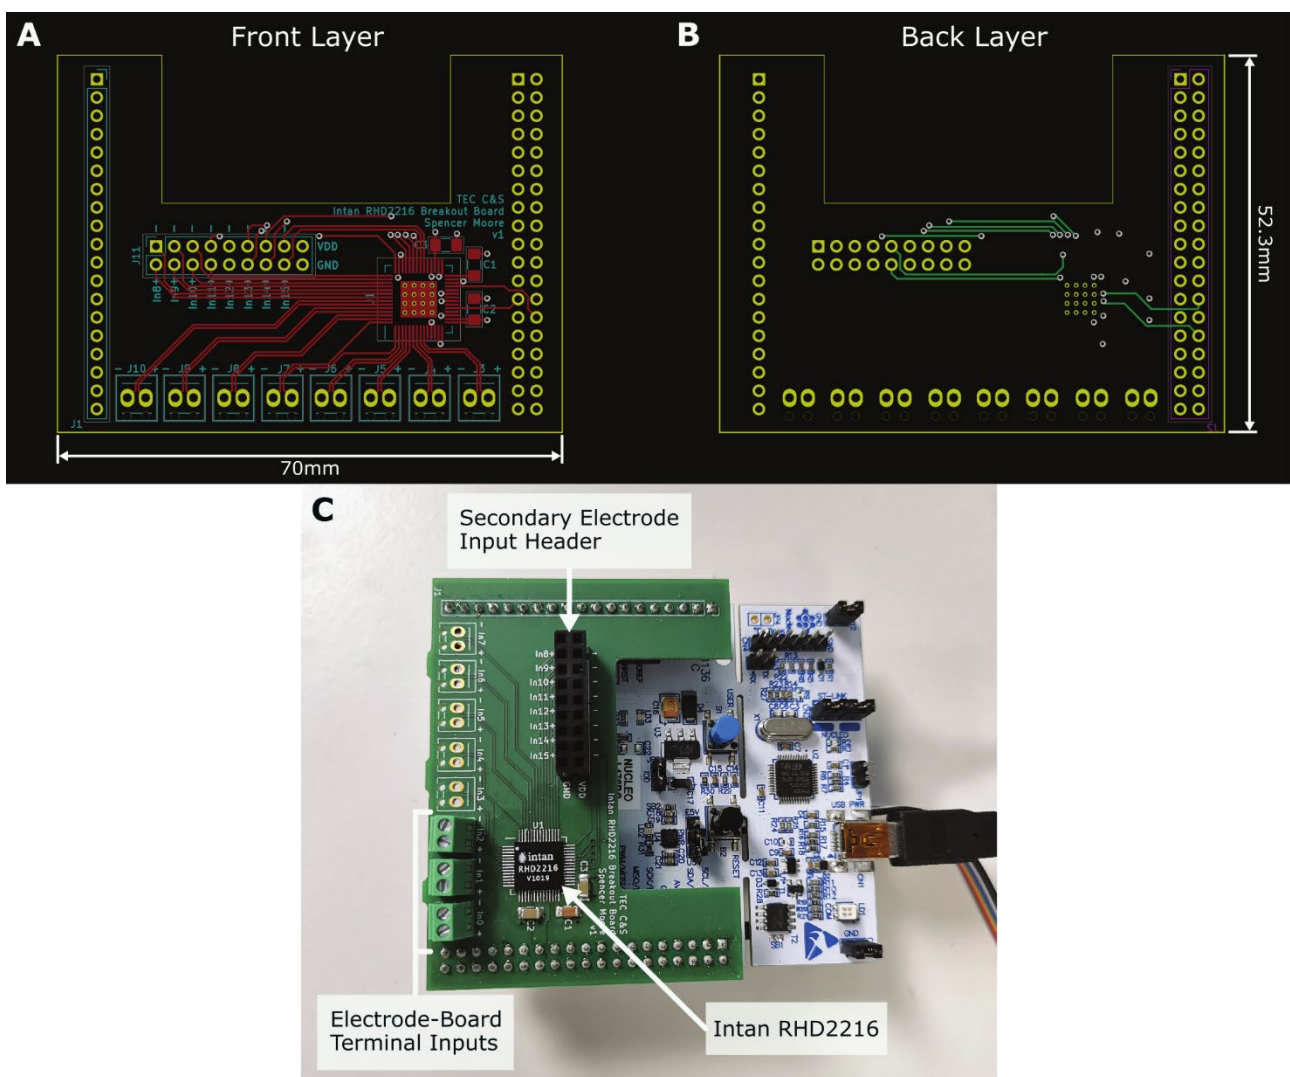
Breakout shield for the Intan RHD2216 electrophysiology chip. PCB schematics of the top (A.) and bottom (B.) signal layers of the Intan Breakout shield. The RHD2216 uses an 8mm x 8mm QFN footprint for mounting. Board size is 70mm x 52.3mm. A cut-out in the shield, making it form a U shape, is there accommodate the microfluidic pump mount on the TEC Control v5 shield B. A fabricated Intan Breakout shield mounted on the Nucleo-64 board. Electrode input terminal blocks and header pins are soldered to provide quick access to the RHD2216 pins.
